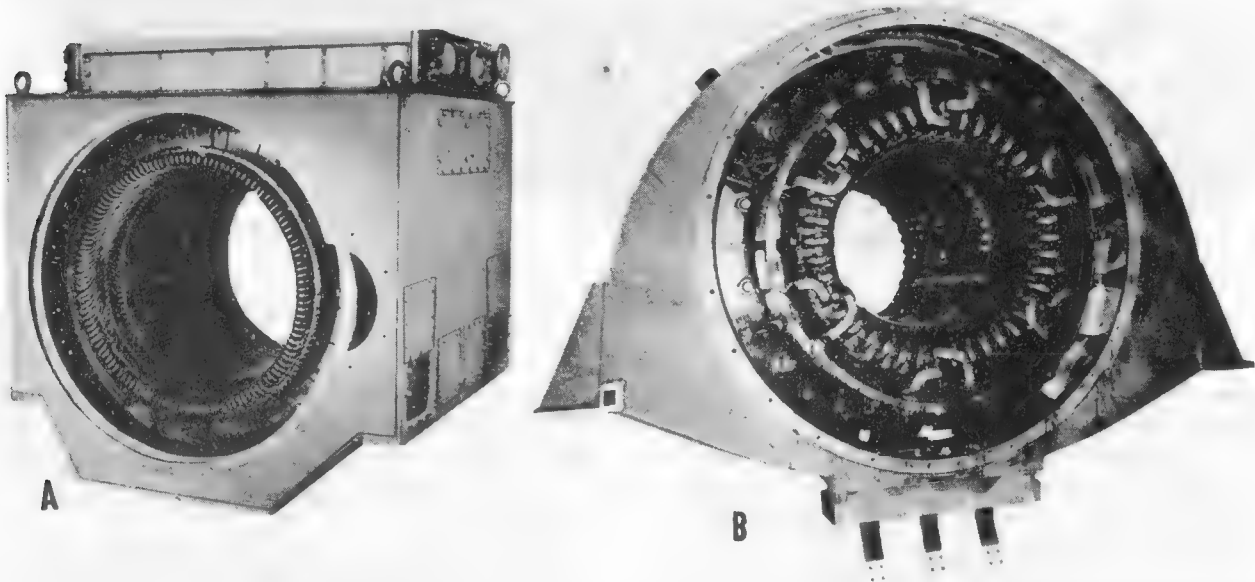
Stators of salient pole (A), and cylindrical rotor (B) alternators.
